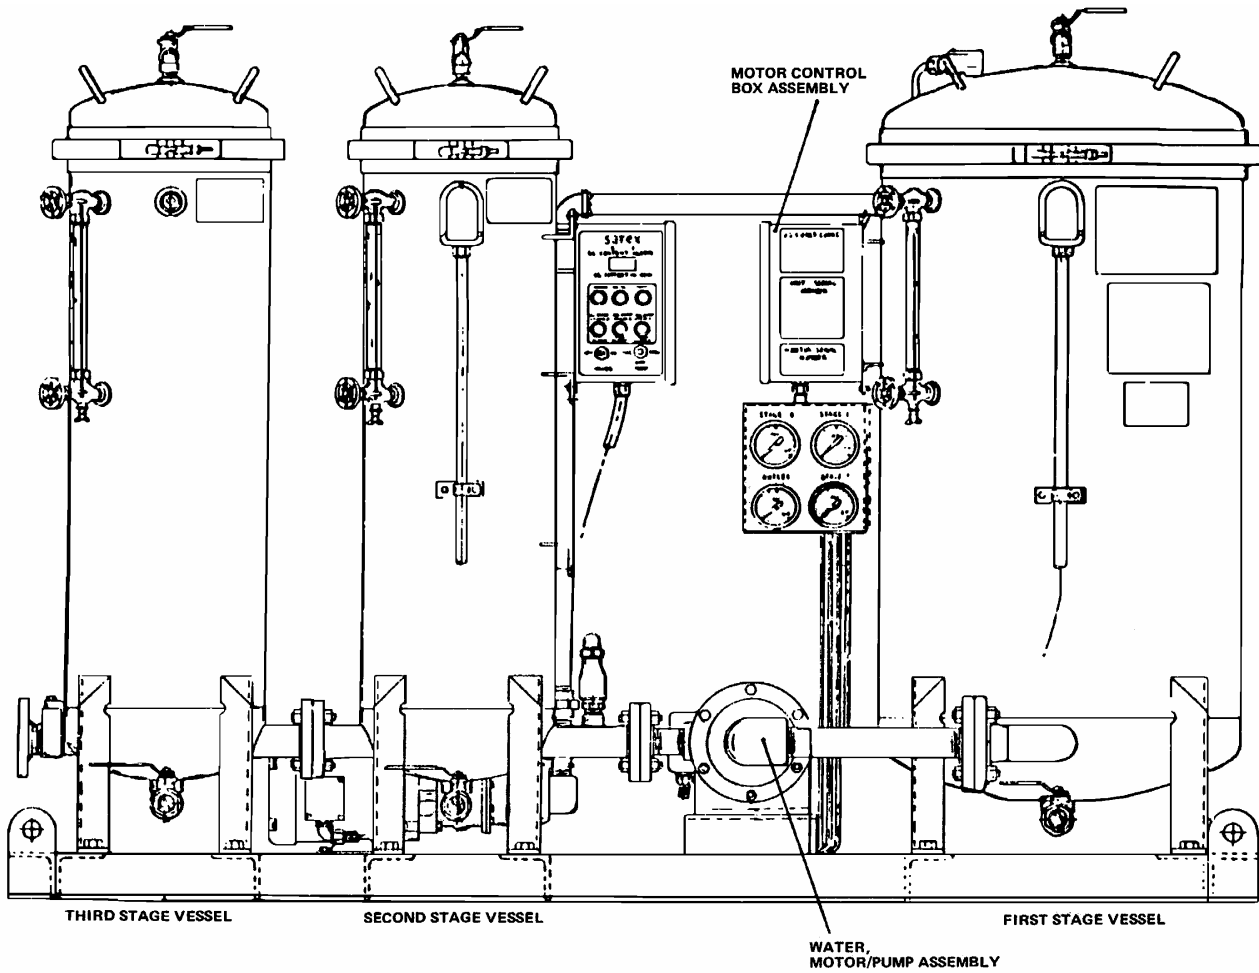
Oil-Water Separator (Sheet 1 of 3).
